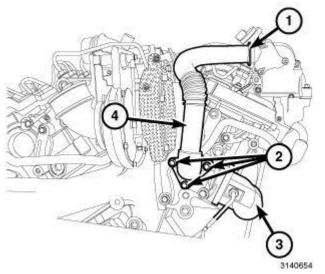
Turbocharger-To-EGR Cooler Tube Clamp Courtesy of CHRYSLER GROUP, LLC
